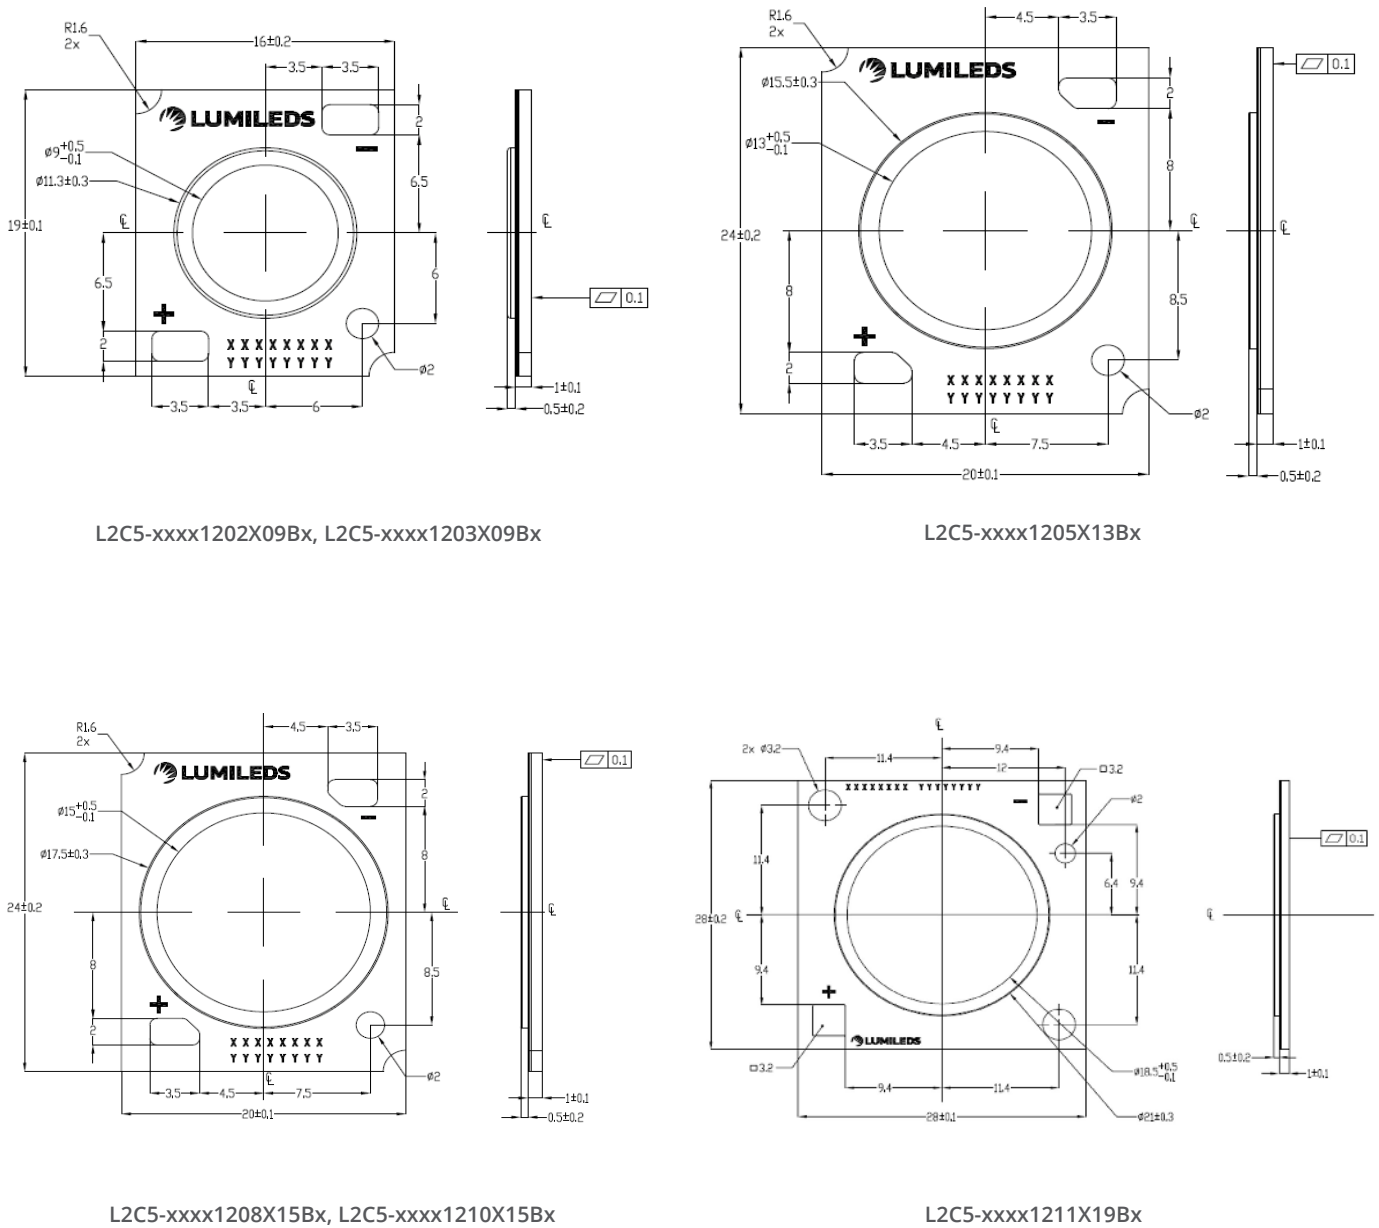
Mechanical dimensions for LUXEON CoB Core Pro.
